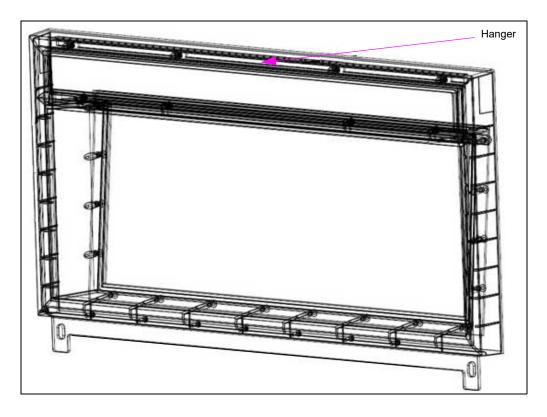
Atlas Bezel Assembly M08400A001 (Front View)
